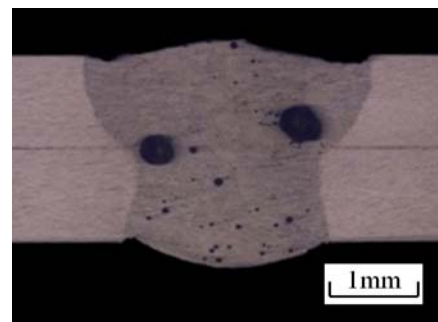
Cross-sectional image of Al6014 alloy laser lap welding
